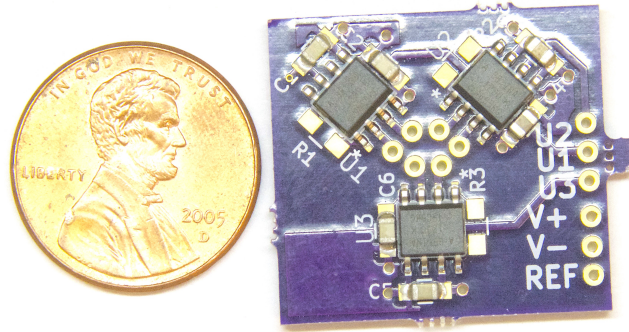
Three Channel INA129 Printed Circuit Board (PCB)
